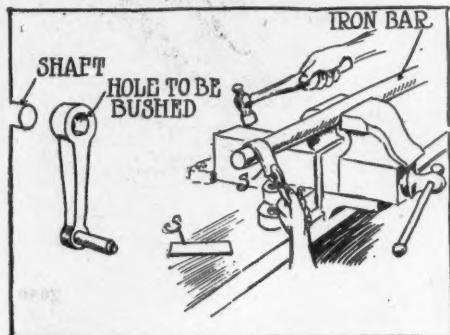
METHOD OF REBUSHING STARTING CRANK
